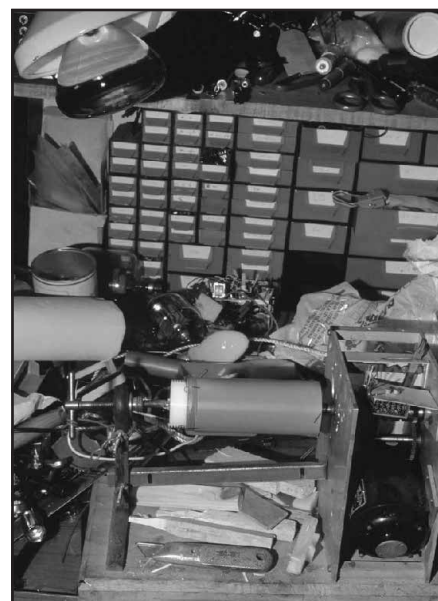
The coil assembly must rotate as the glue dries. I used the winding machine at low speed, and directed the beam of an infrared lamp on the coil tube, in order to speed up the setting of the glue.
